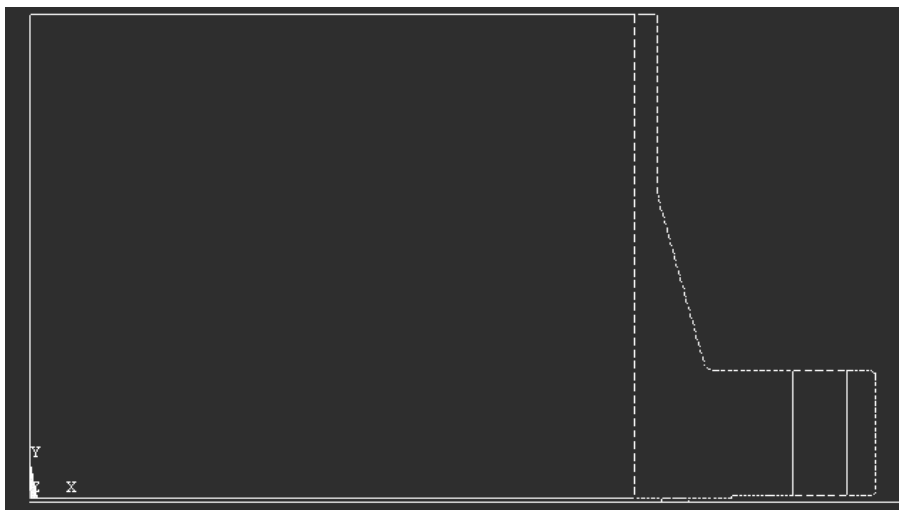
The Right Top Symmetric Quarter of the Flange Joint.
